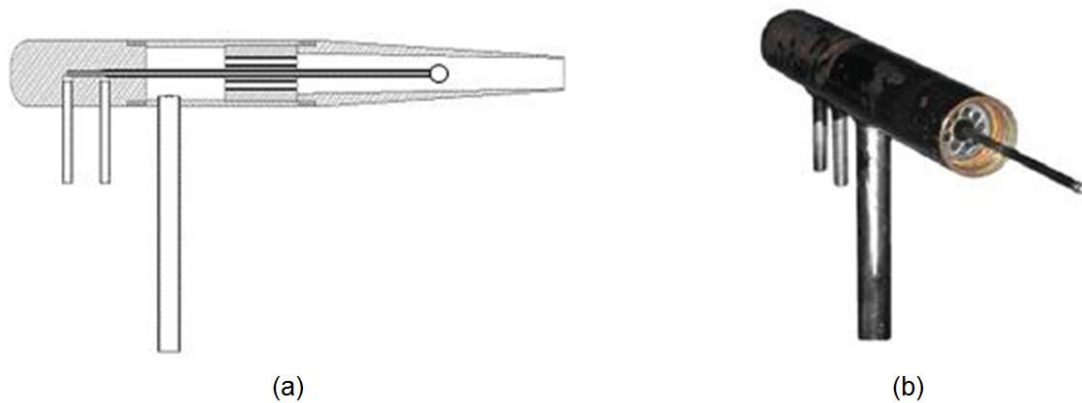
Injector nozzle (a) Cross section view (b) without conical nozzle
